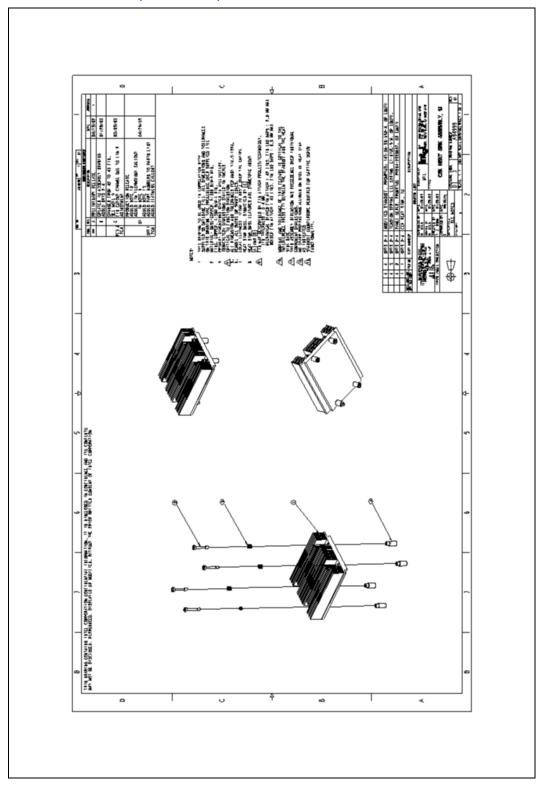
1U CEK Heatsink (Sheet 2 of 4)
